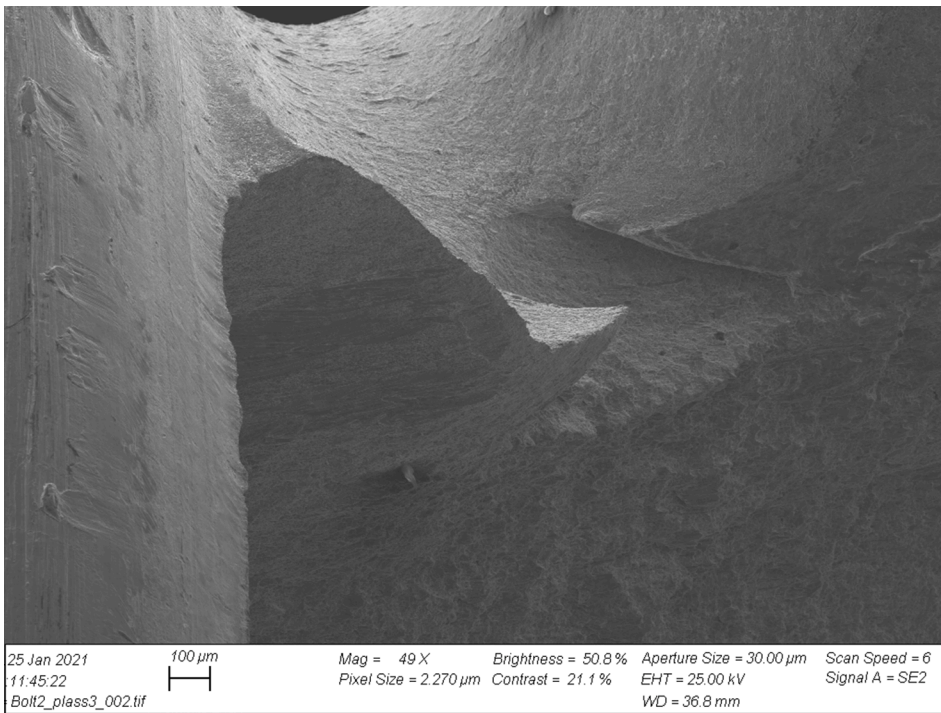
SEM image of broken bolt B at first engaged threads, with Mag = 49X.
